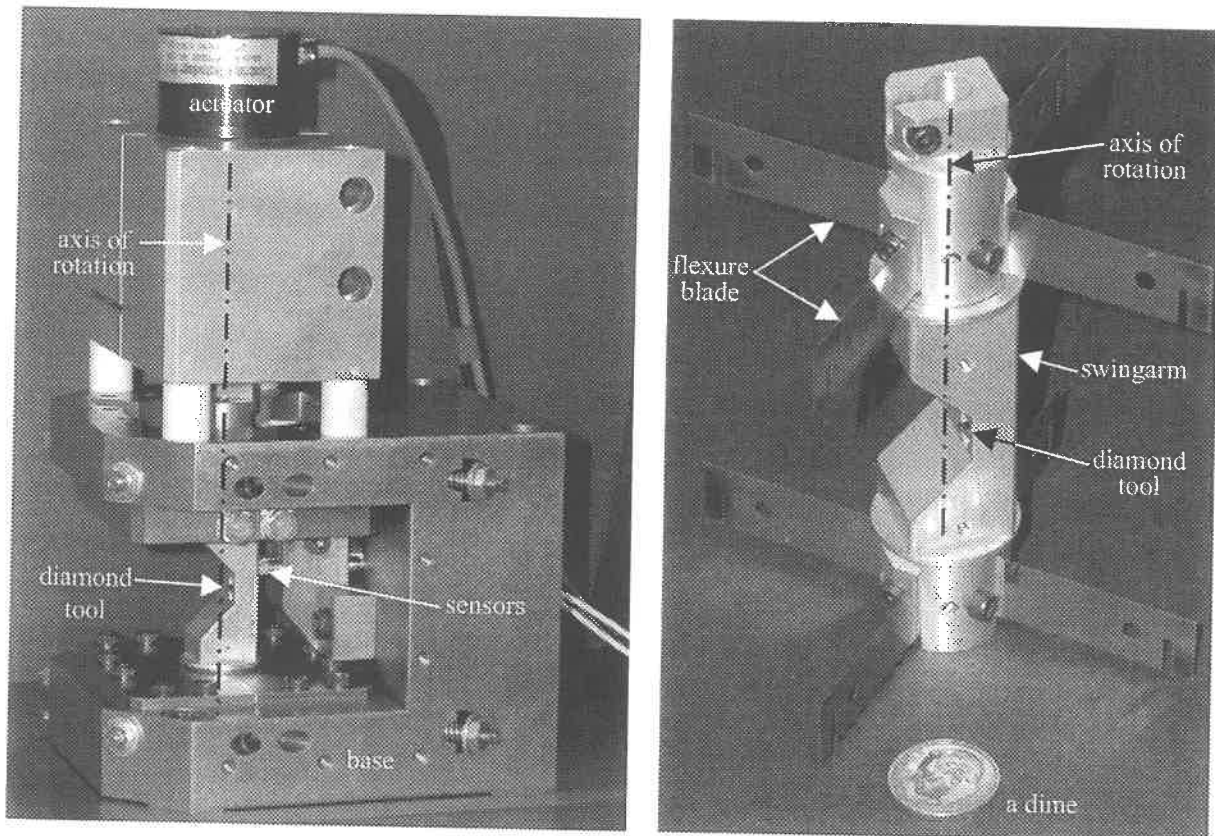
Our 2 kHz rotary fast tool servo (left), and its rotating element not including the actuator (right).
